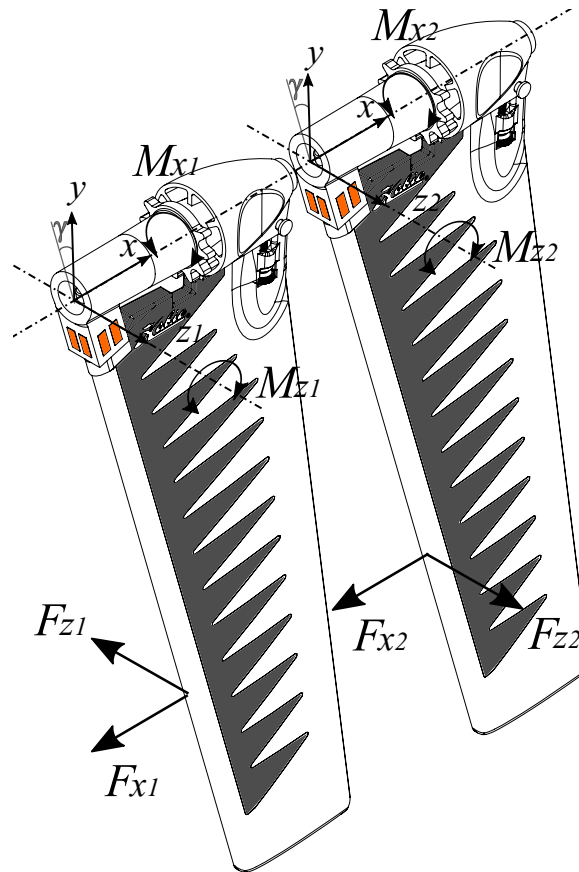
Instrumented kayak equipped with the Mirage Drive
